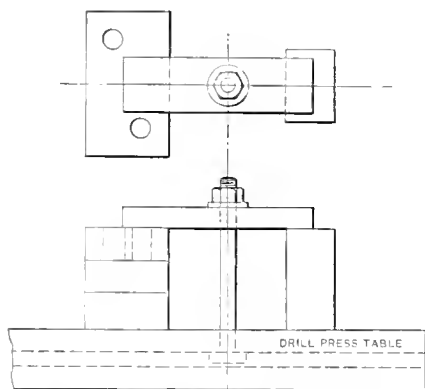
Holding Jig and Work on Drill Press Table. Two Pieces drilled at Once.
